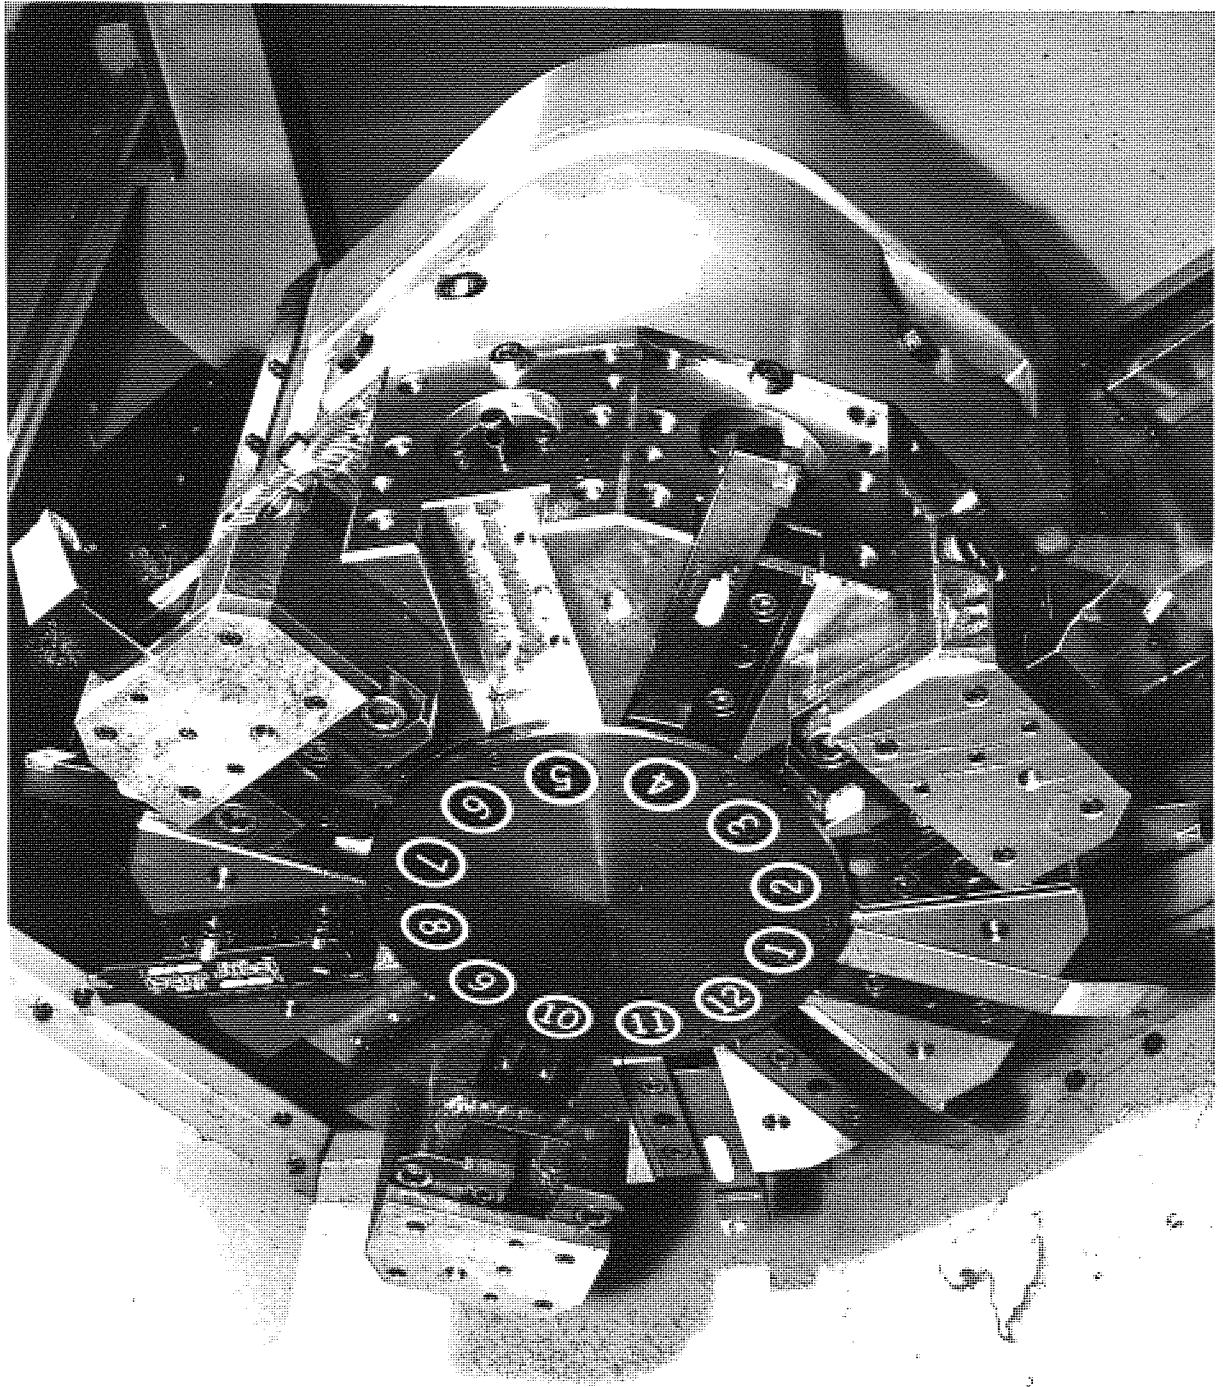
TOOLING SETUP IN THE TURRET OF THE CNC LATHE
